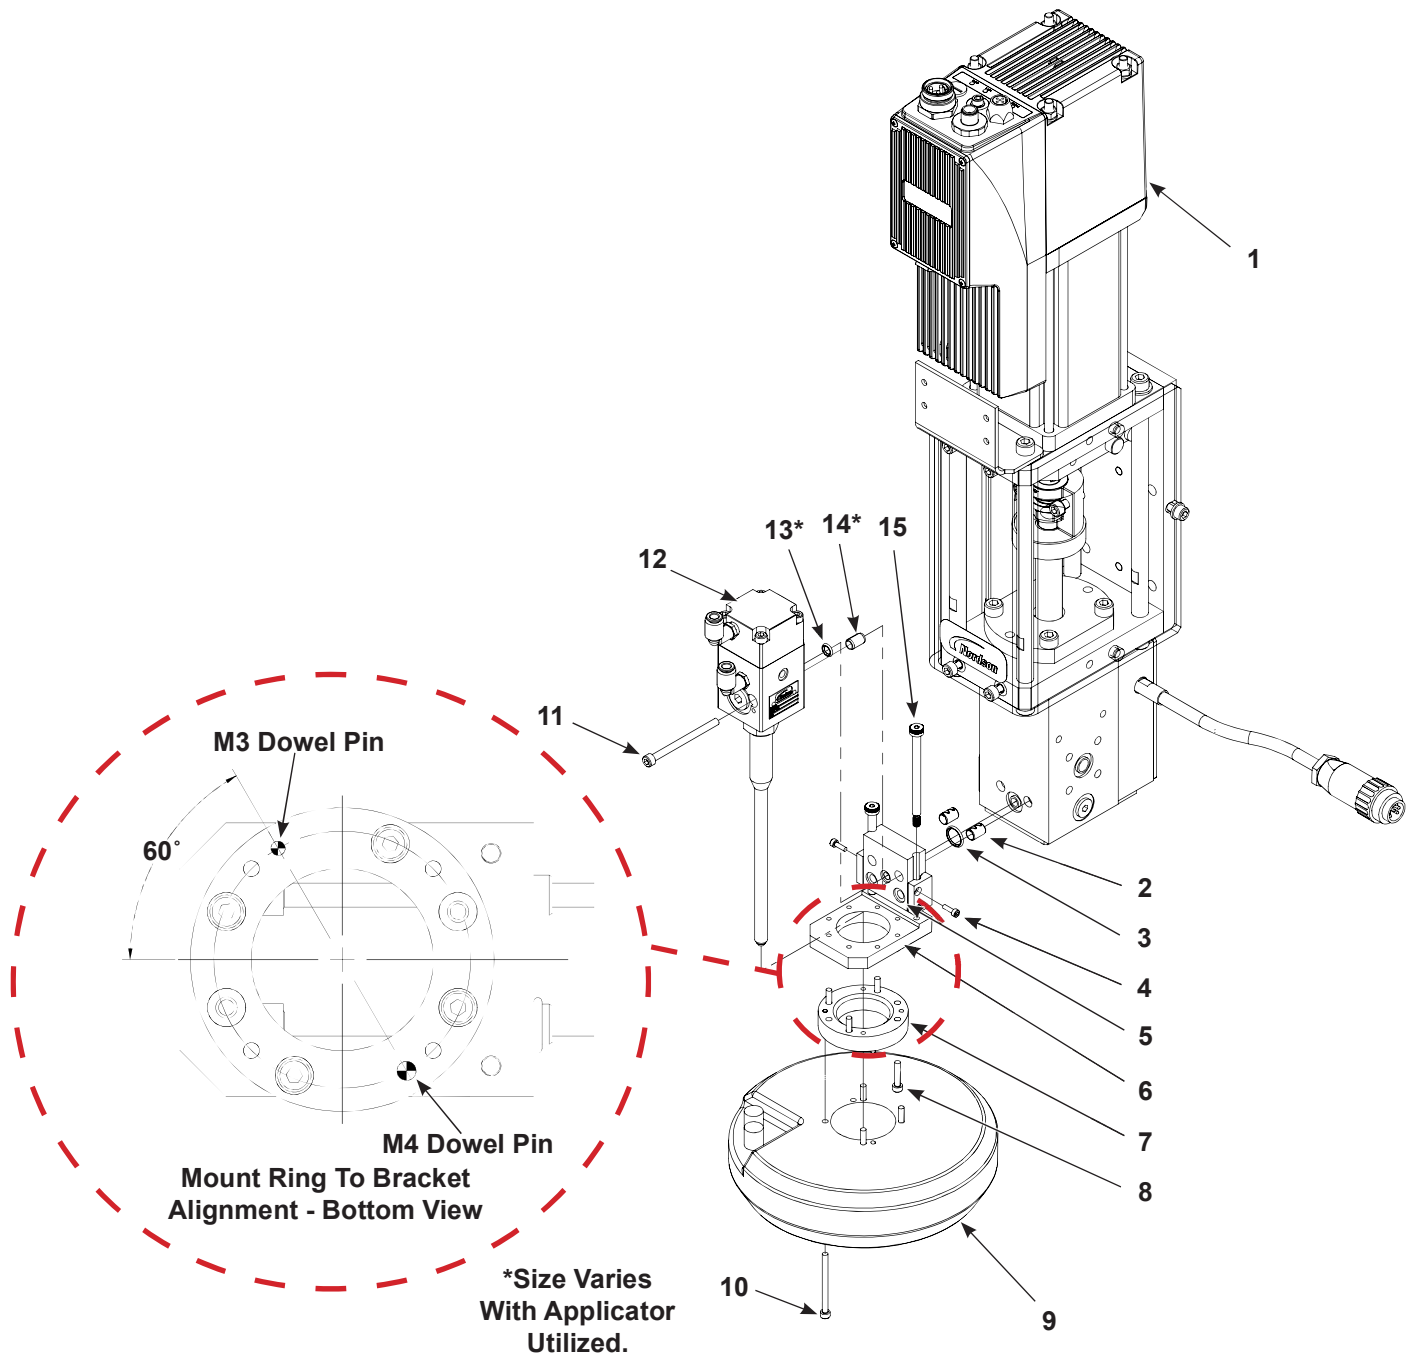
Manifold Mounting Kit (Ambient or Electric Heat)
